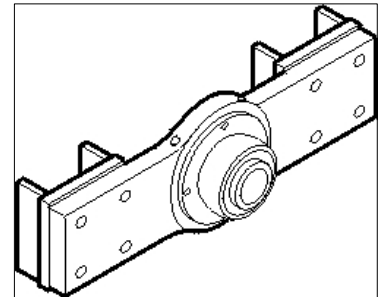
DOUBLE-ARM SPHERICAL BEARING MOUNT
